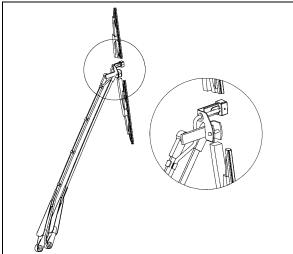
WINDSHIELD WIPER ( DRIVER SIDE)
